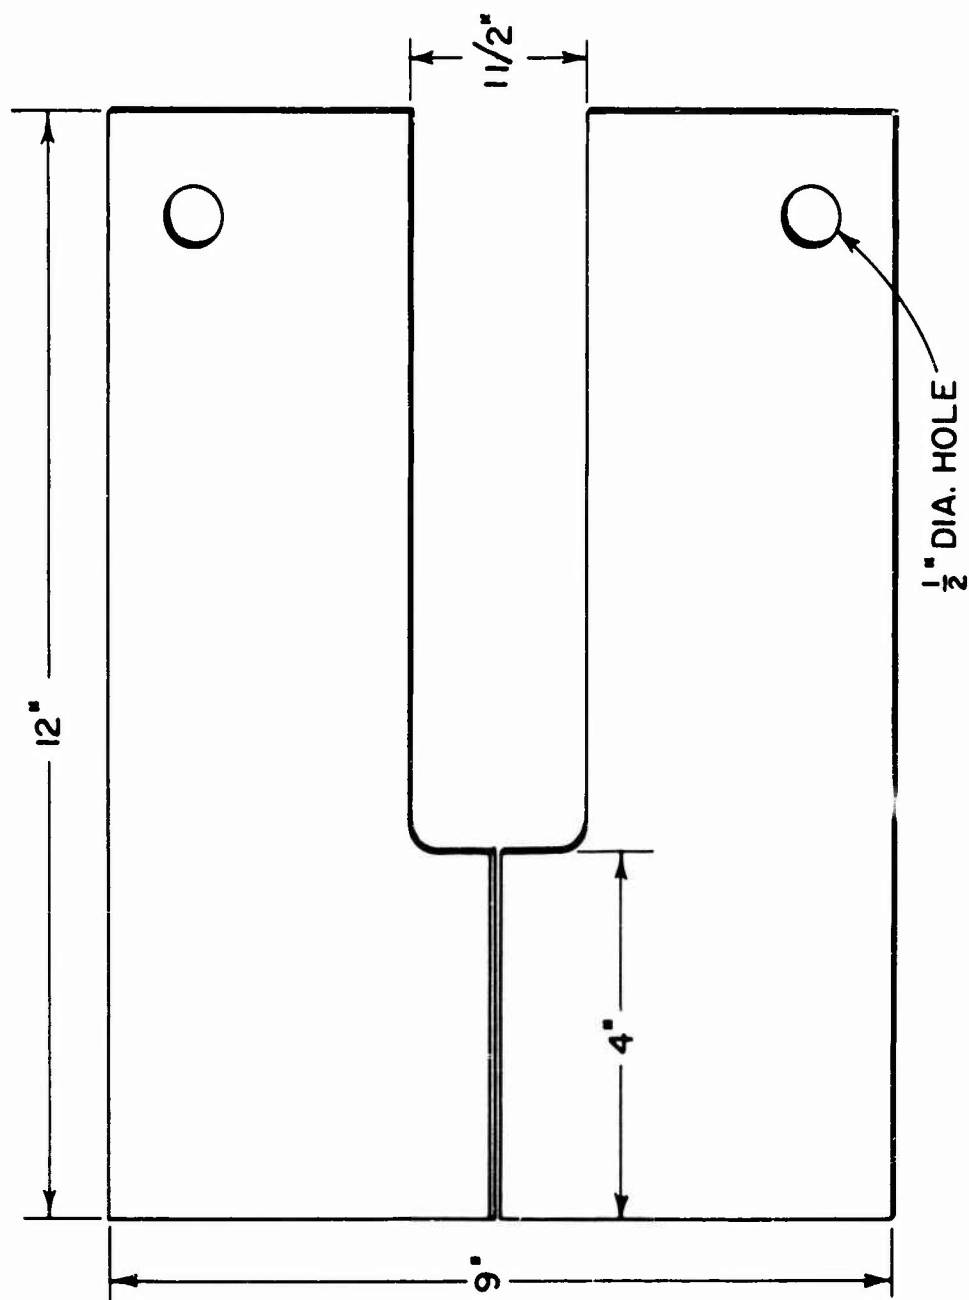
9 Inch Moment Arm Specimen Design for Horizontal Lever Arms
